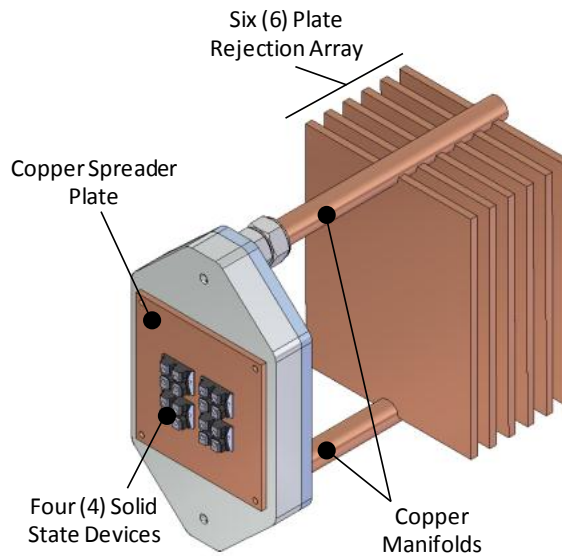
Isometric view of demonstration thermosiphon solid model
